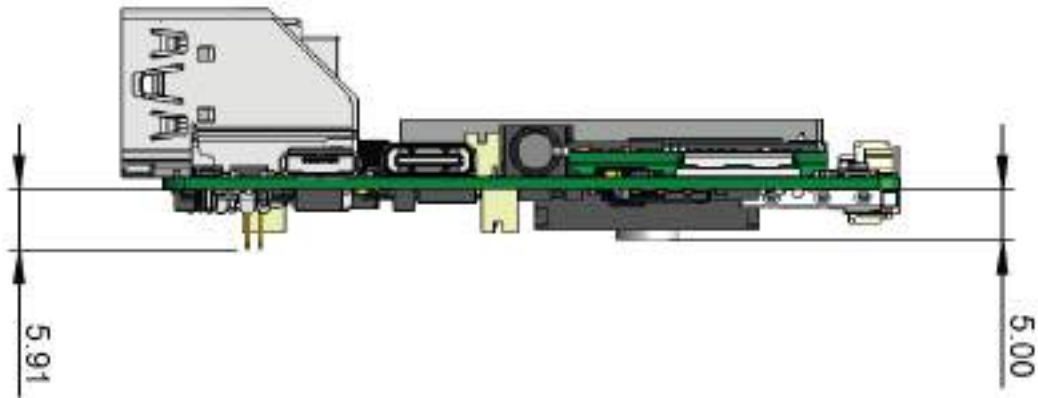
Mechanical Dimensions of i.MX 8X Lite Pico ITX SBC Side View-2
